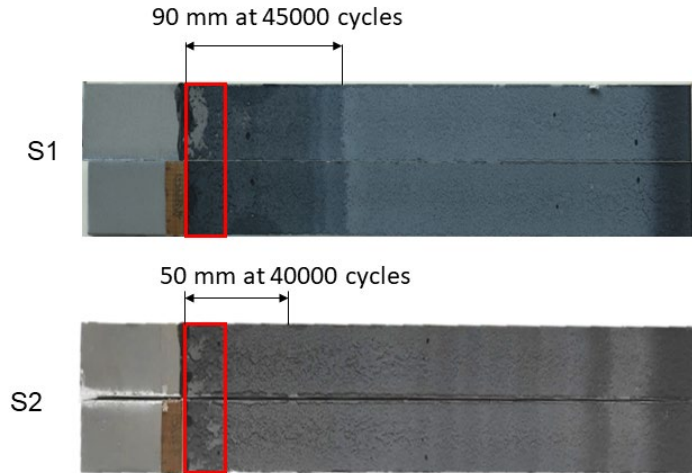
Fracture surface of specimens S1 and S2 after the fatigue crack propagation tests.
